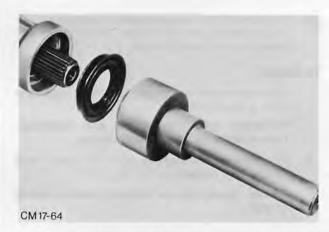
Press oil seal into transmission extension housing using Tool 17–002
